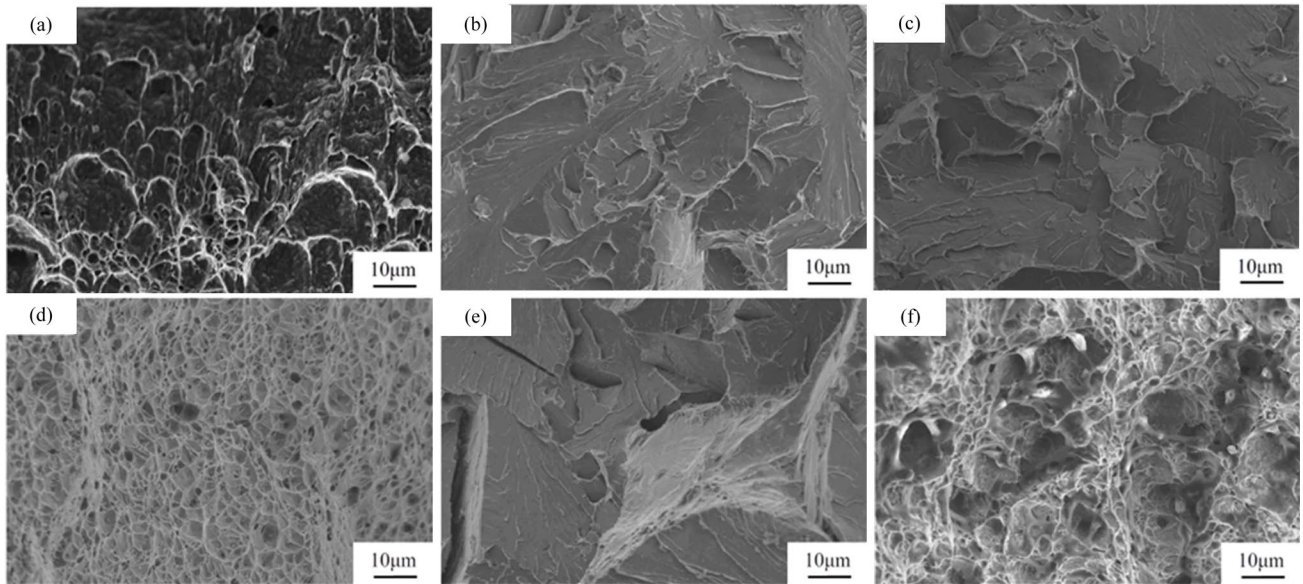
Fracture morphology of welded joints of 12MnNiVR steel: (a) the center of weld metal of TFS, (b) fusion line of TFS, (c) fusion line +2 mm of TFS, (d) the center of weld metal of TCS, (e) fusion line of TCS, (f) fusion line +2 mm of TCS
